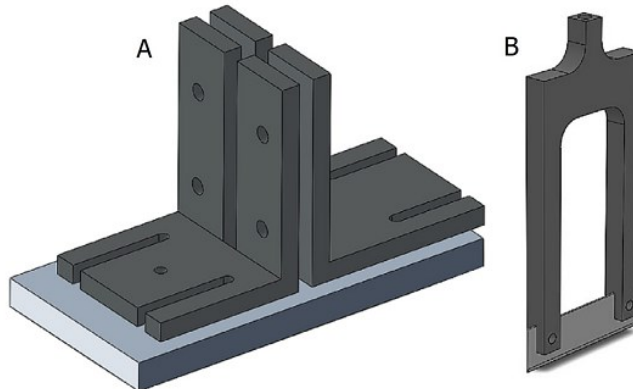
Clamping profiles for fixing the elastomer specimens (A), the blade clamp with a blade (B).
